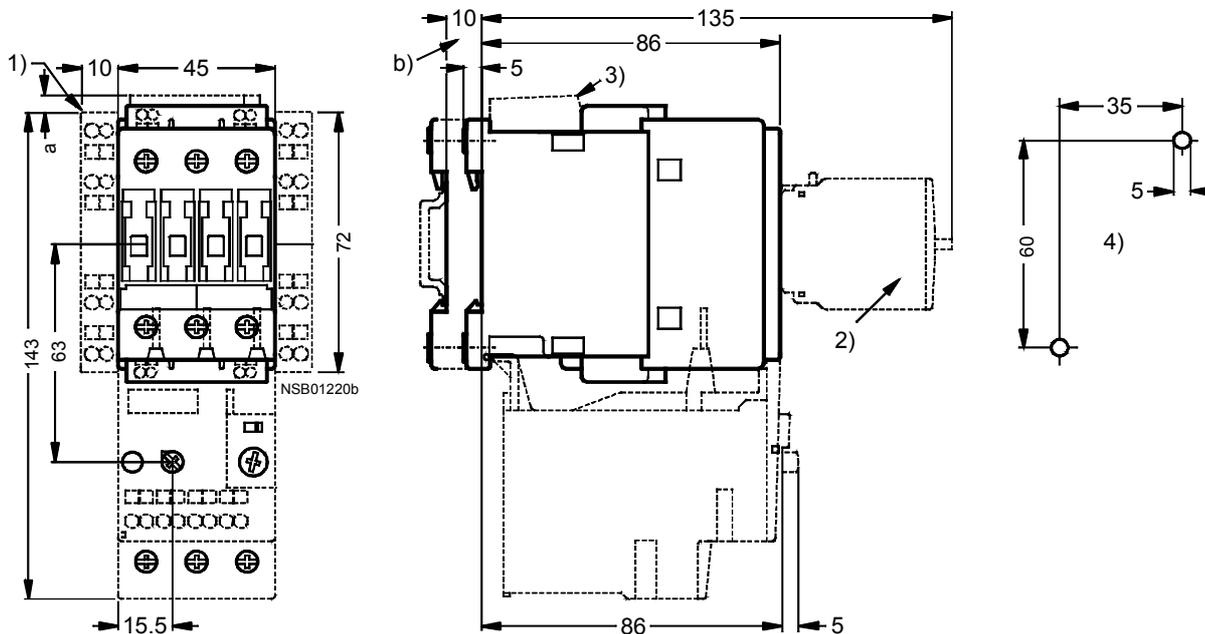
3RT10 2 contactors. 3RT10 2 coupling contactors with surge suppressor, auxiliary contact block and installed overload relay (Cage Clamp-connection)
